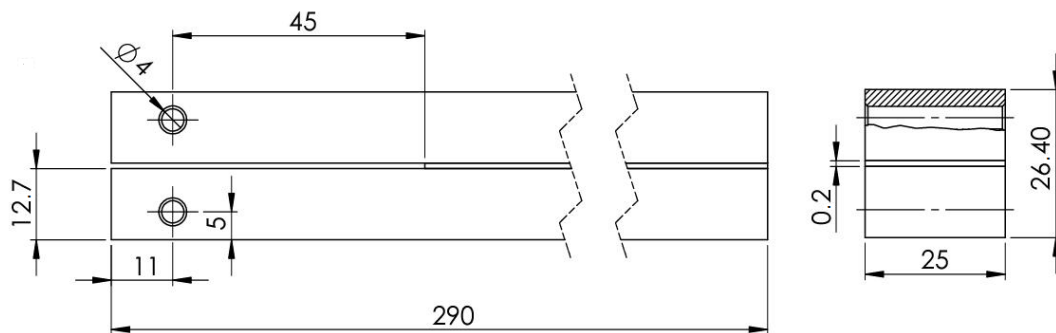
Geometry of the DCB specimen (dimensions in mm).
